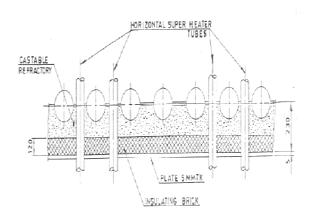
Refractory Arrangement at PSH & SSH Coil opening
